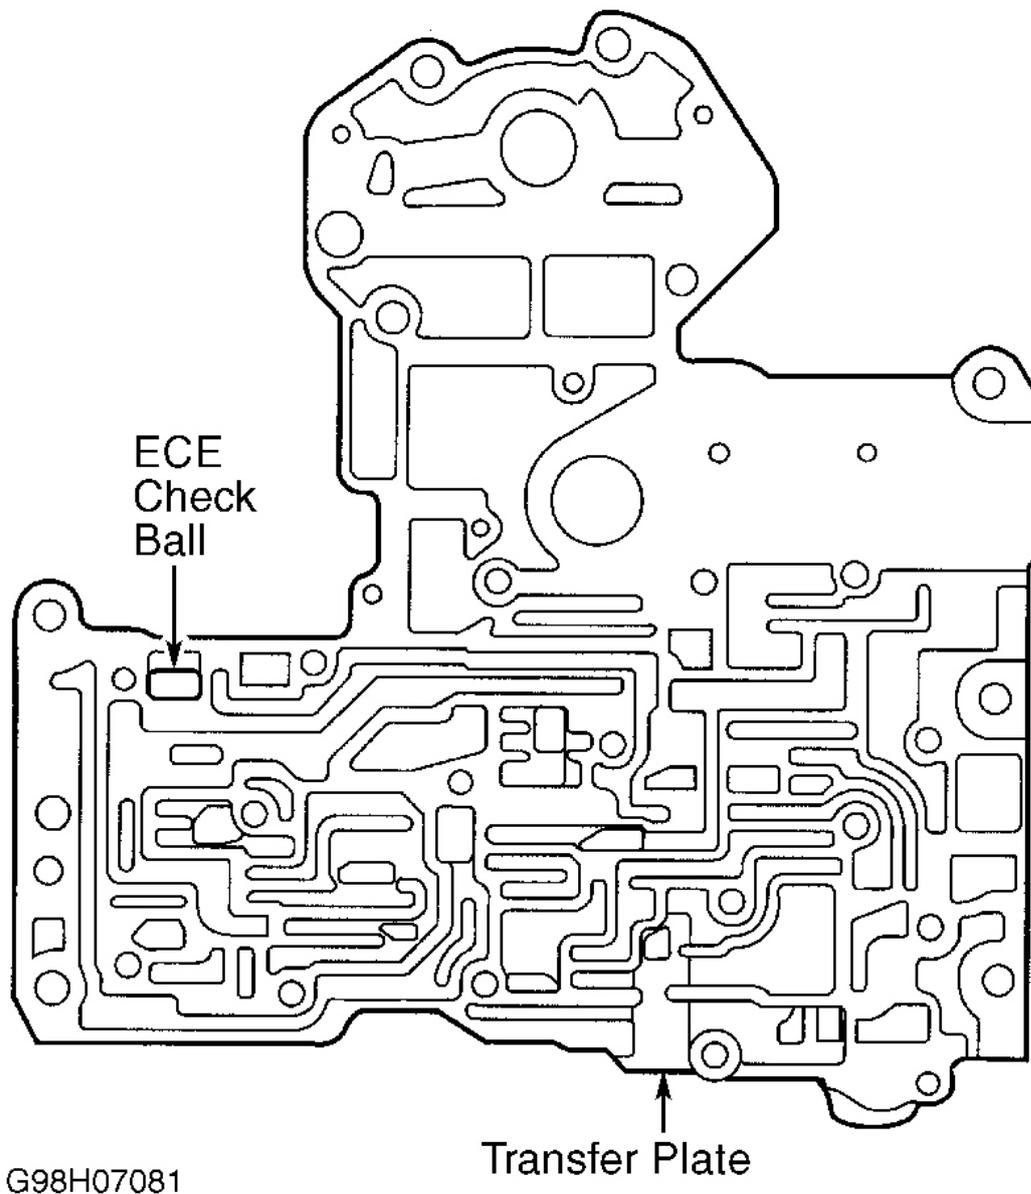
Identifying ECE Check Ball Location (1998 Models)
